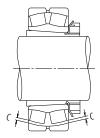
Clearance Measurement of Spherical Roller Bearing
